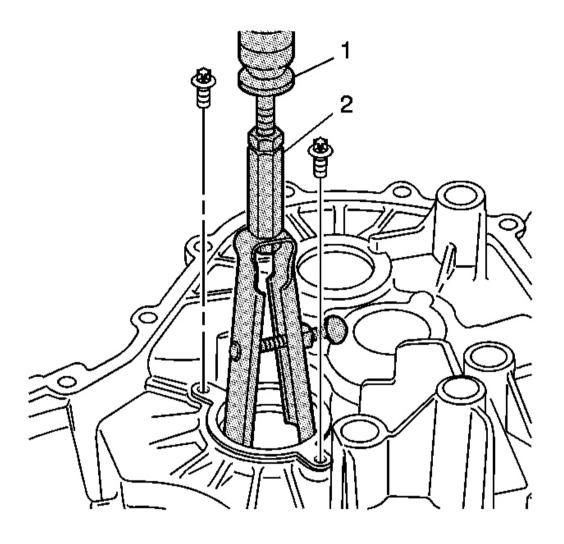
Output Shaft Bearing Race, Bolts, J 23907 & J 44380 Courtesy of GENERAL MOTORS CORP.
